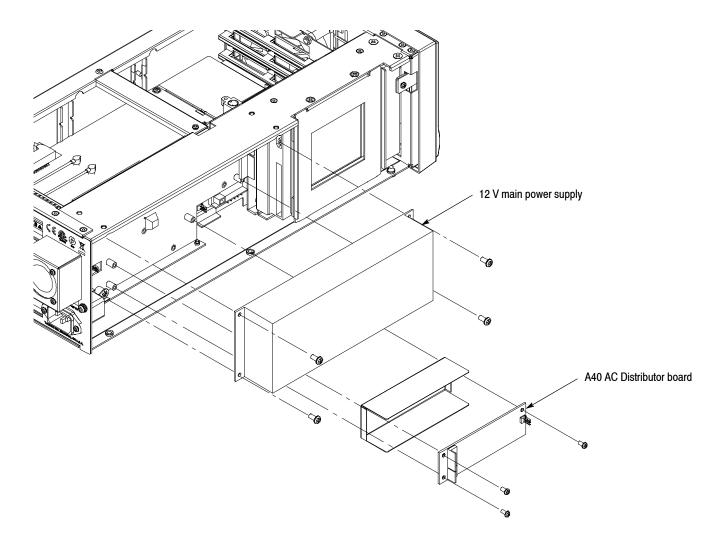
12 V main power supply and A40 AC Distributor board removal
